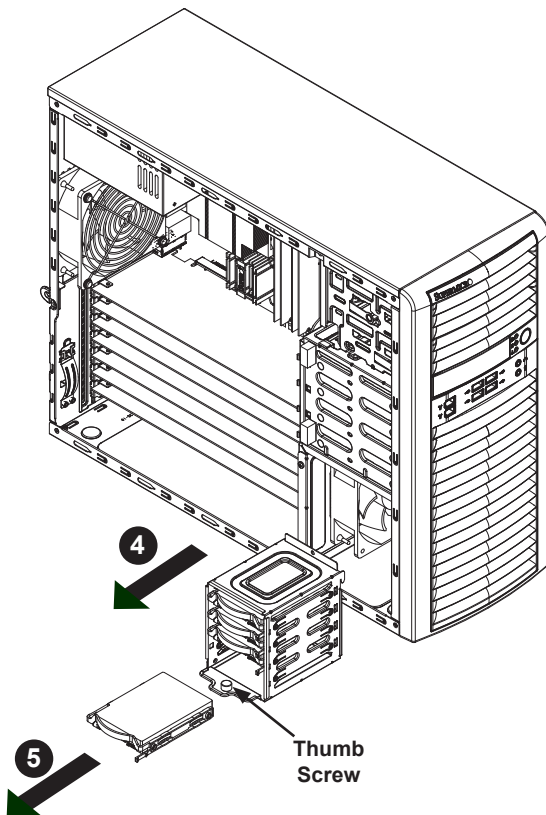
Installing the Hard Drive Carrier into the Hard Drive Cage
